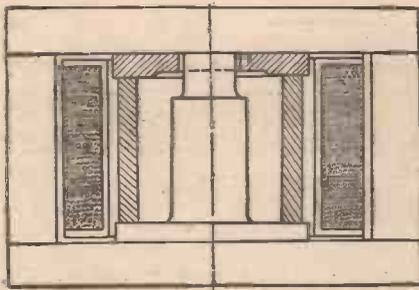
Another method of magnetizing, in which the complete magnet assembly is placed within a field winding with iron yoke.
